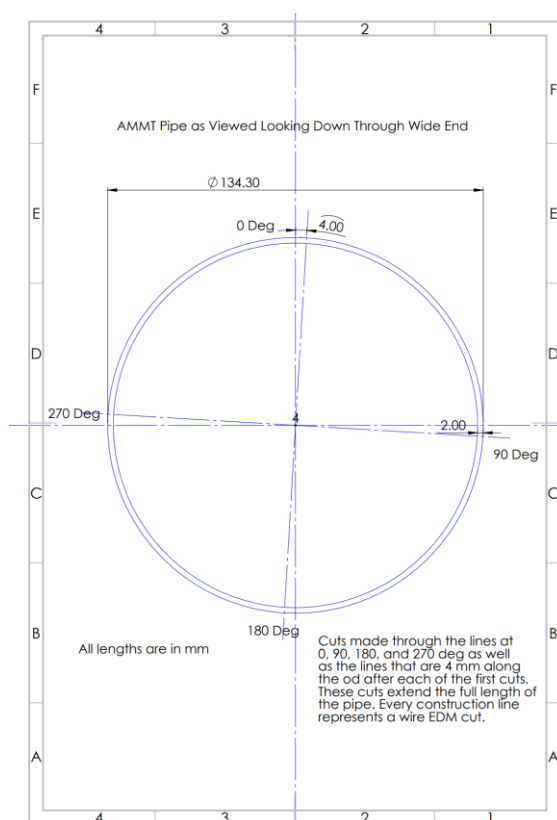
Cross-section view of the sectioning plan showing the 4 mm wide specimens cut from the DED 316 L SS component.
